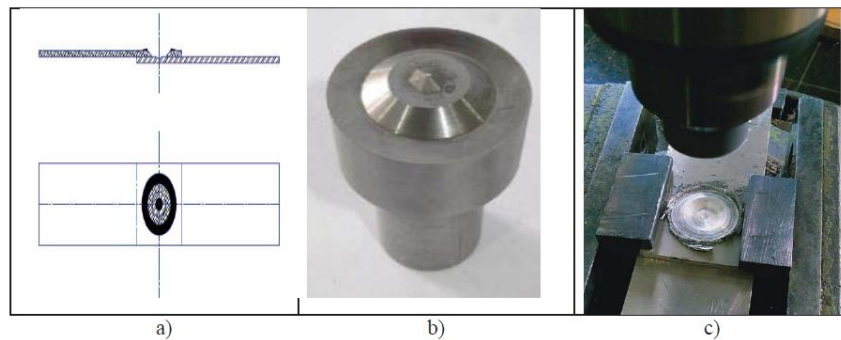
(a) Lap position of work material, (b) FSSW tool geometry, (c) Setup on machine with fixture
